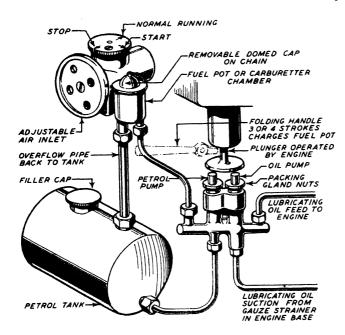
Fuel and lubricating oil feed systems on the Lister hopper-cooled (four-stroke) engine
